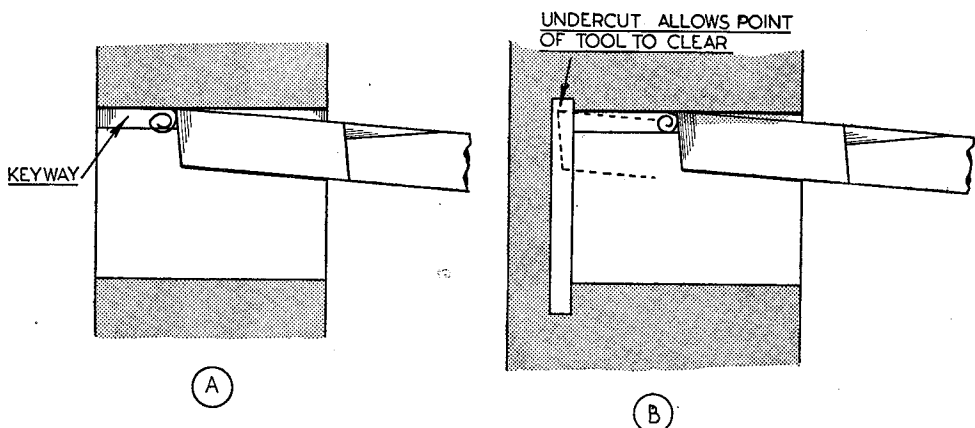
"A"—the tool cutting a through keyway ; "B"—method of providing end-clearance in a blind bore
